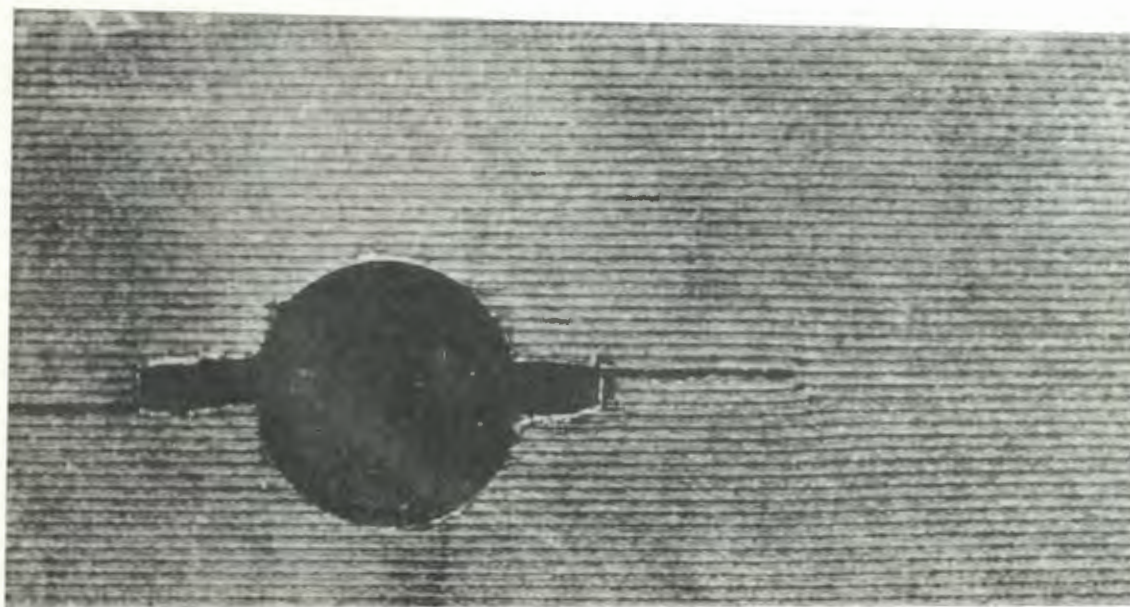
The same specimen slightly loaded in tension. Note the fatigue crack and the deformation at the bottom of this crack (R. Dechaene)
